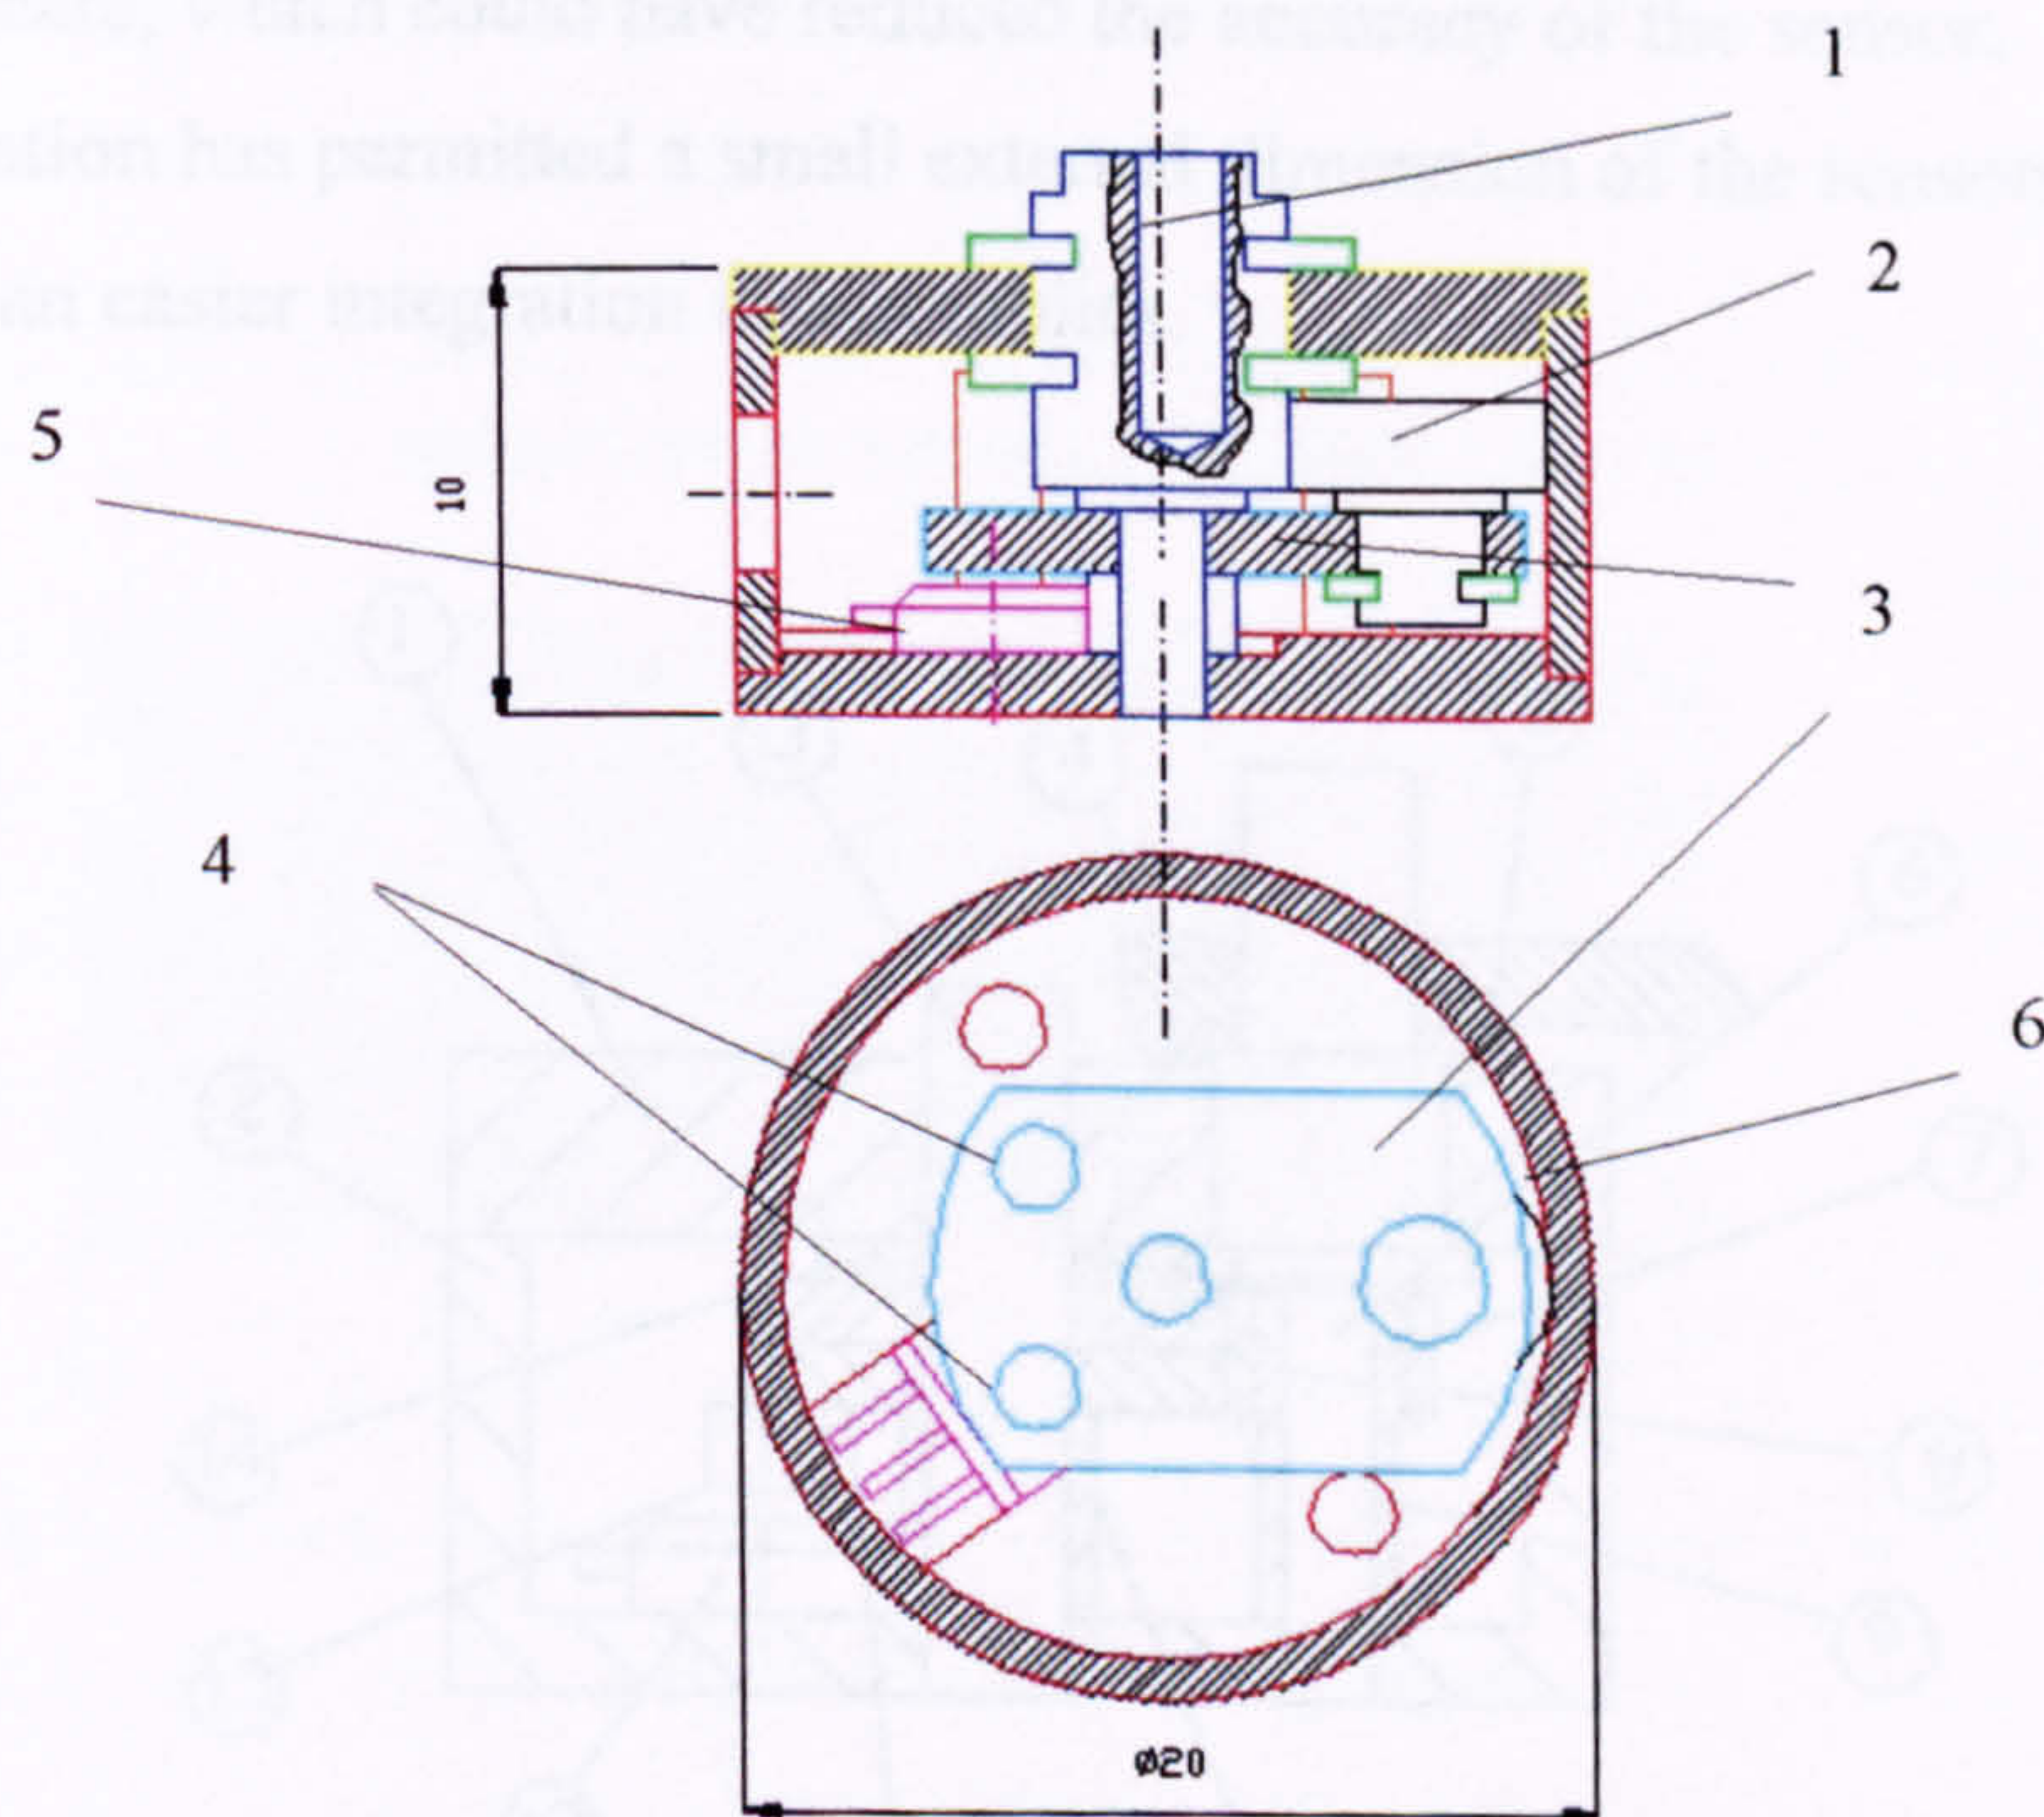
Mechanical drawing of the 1<sup>st</sup> prototype sensor
